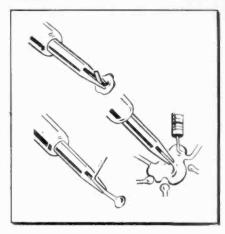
Slotted heads are useful for straightening lugs and removing solder.
